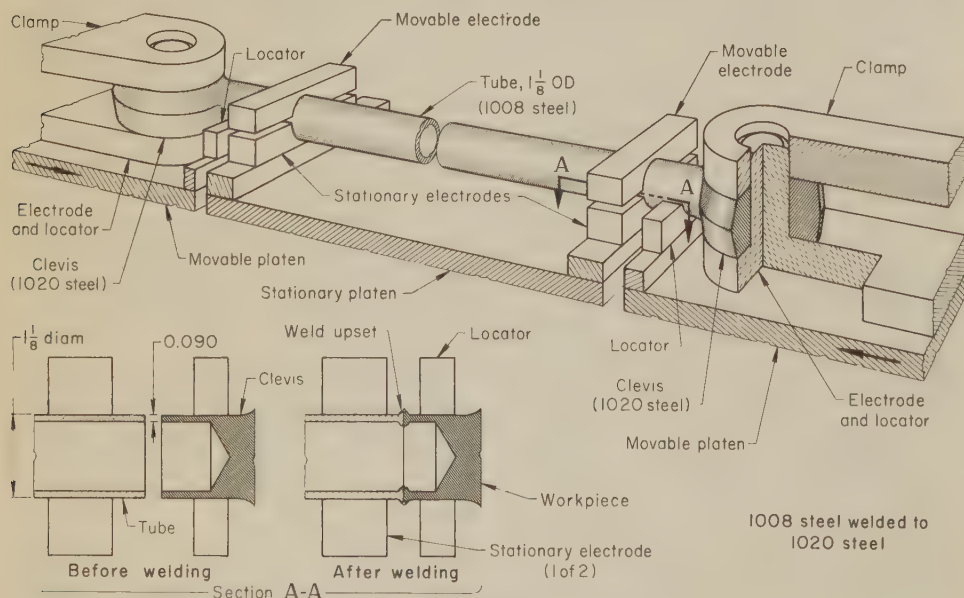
Setup for simultaneous flash welding of two forged clevises to the ends of a tube, in which a special fixture was used to maintain angular alignment (Example 431)
